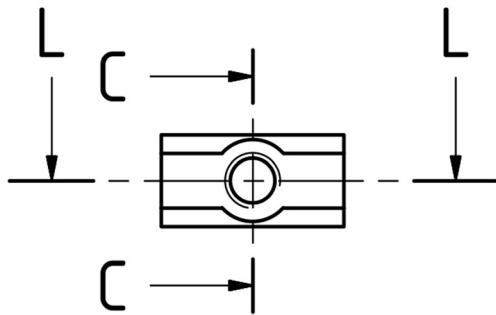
Definition of section views in top view (L longitudinal section; C cross section)
